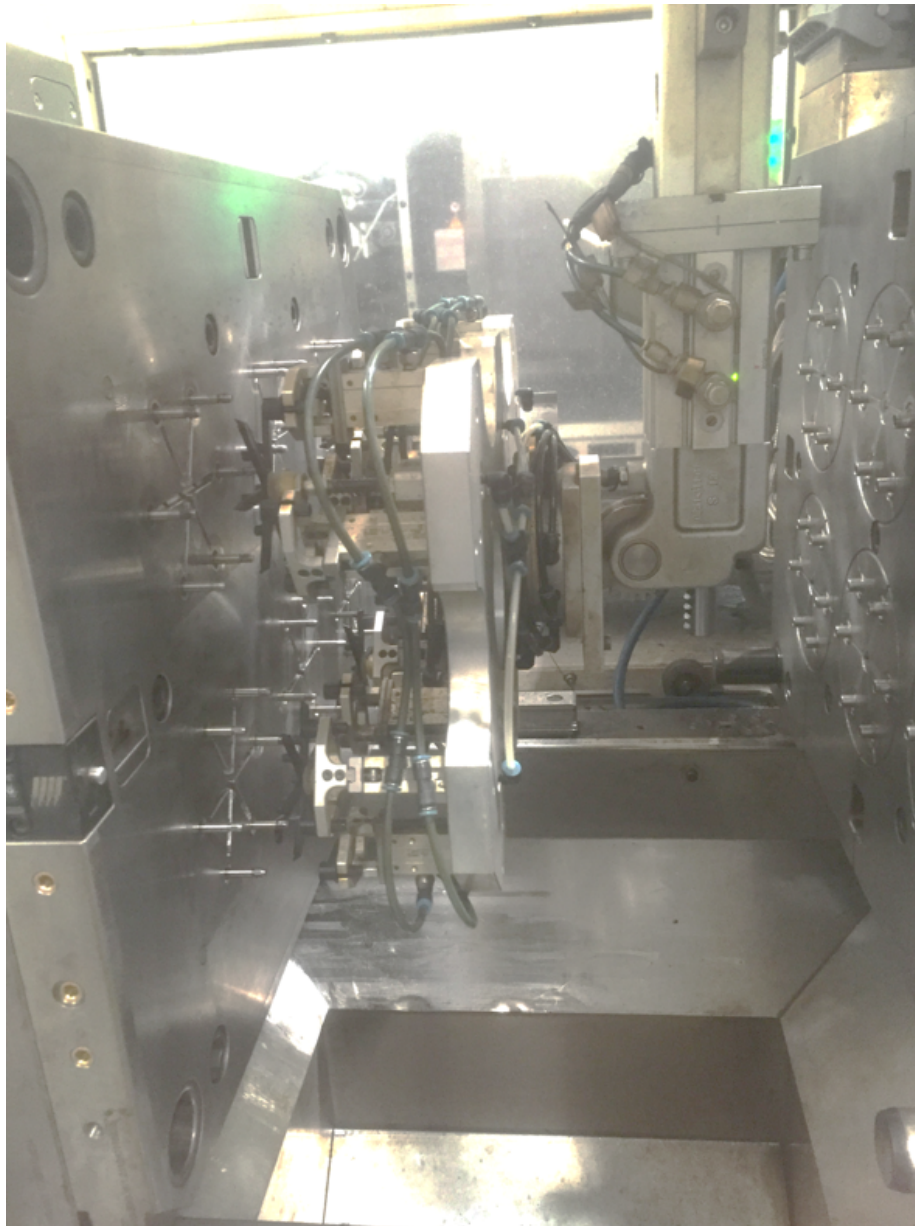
A gripper assembly between the two halves of the injection molding tool in the open position. The gripper is used to extract finished parts after they have been molded (Source: Sture Sørli, Kongsberg Automotive Raufoss, 2016)
